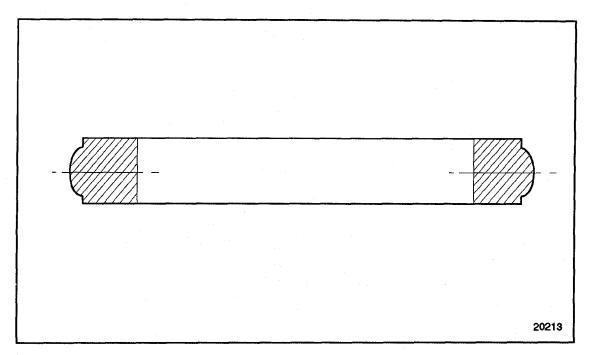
Cylinder Liner Seal Ring Cross-section
